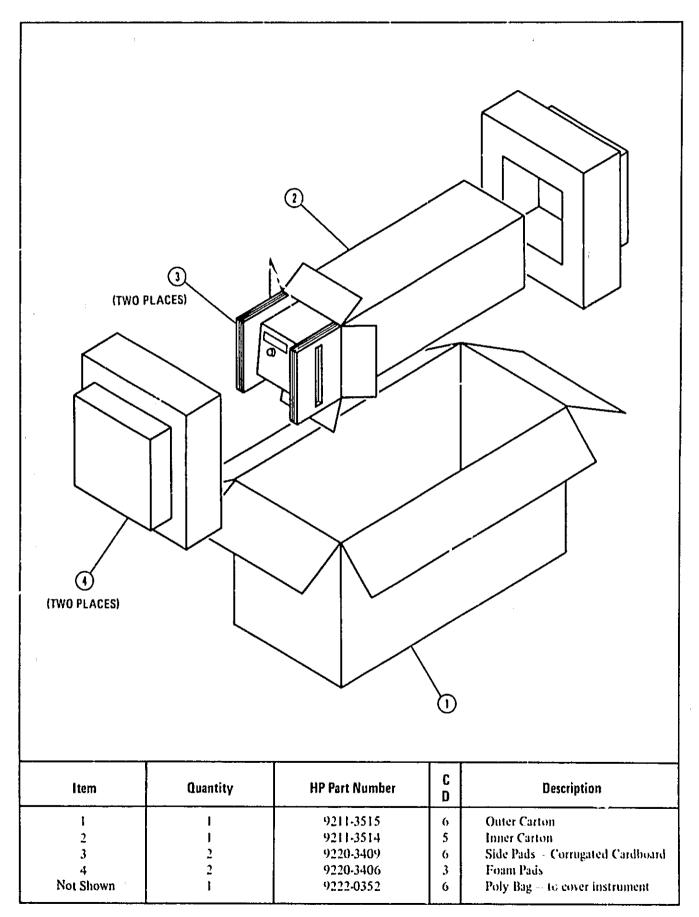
Packaging for Shipment Using Factory Packaging Materials
